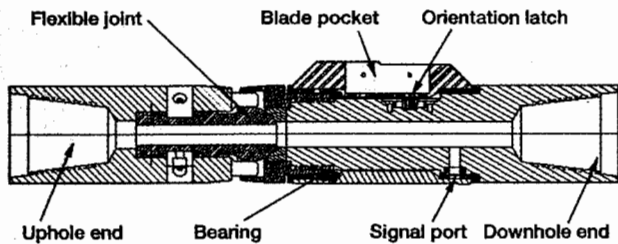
Drawing of a 6-in. curve drilling tool.
